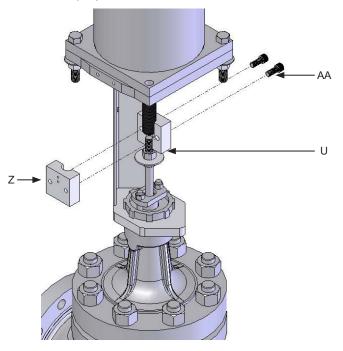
Center of Rod Clevis holes are approximately centered with gap between Stud Extension and Valve Stem (Section of Housing Assembly hidden for clarity)
